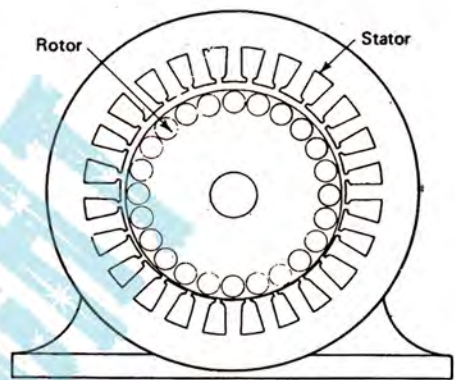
A worn bearing may cause the rotor to rub on the stator core.
